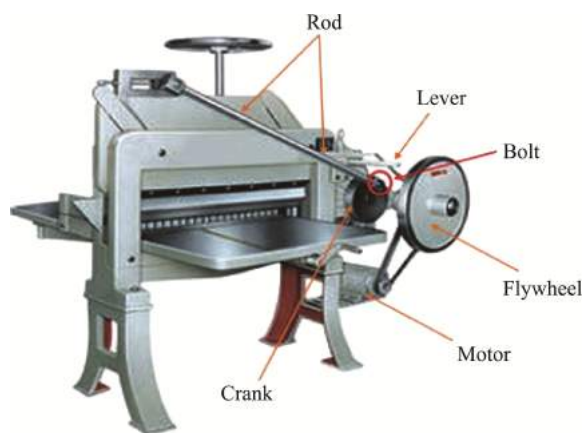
Illustration of Machine (Source: <https://toyoprintingmachine.en.made-in-china.com/product/mvknrNBHYgc/China-Dq-201-Mechanical-Paper-Cutting-Machine.html>)
